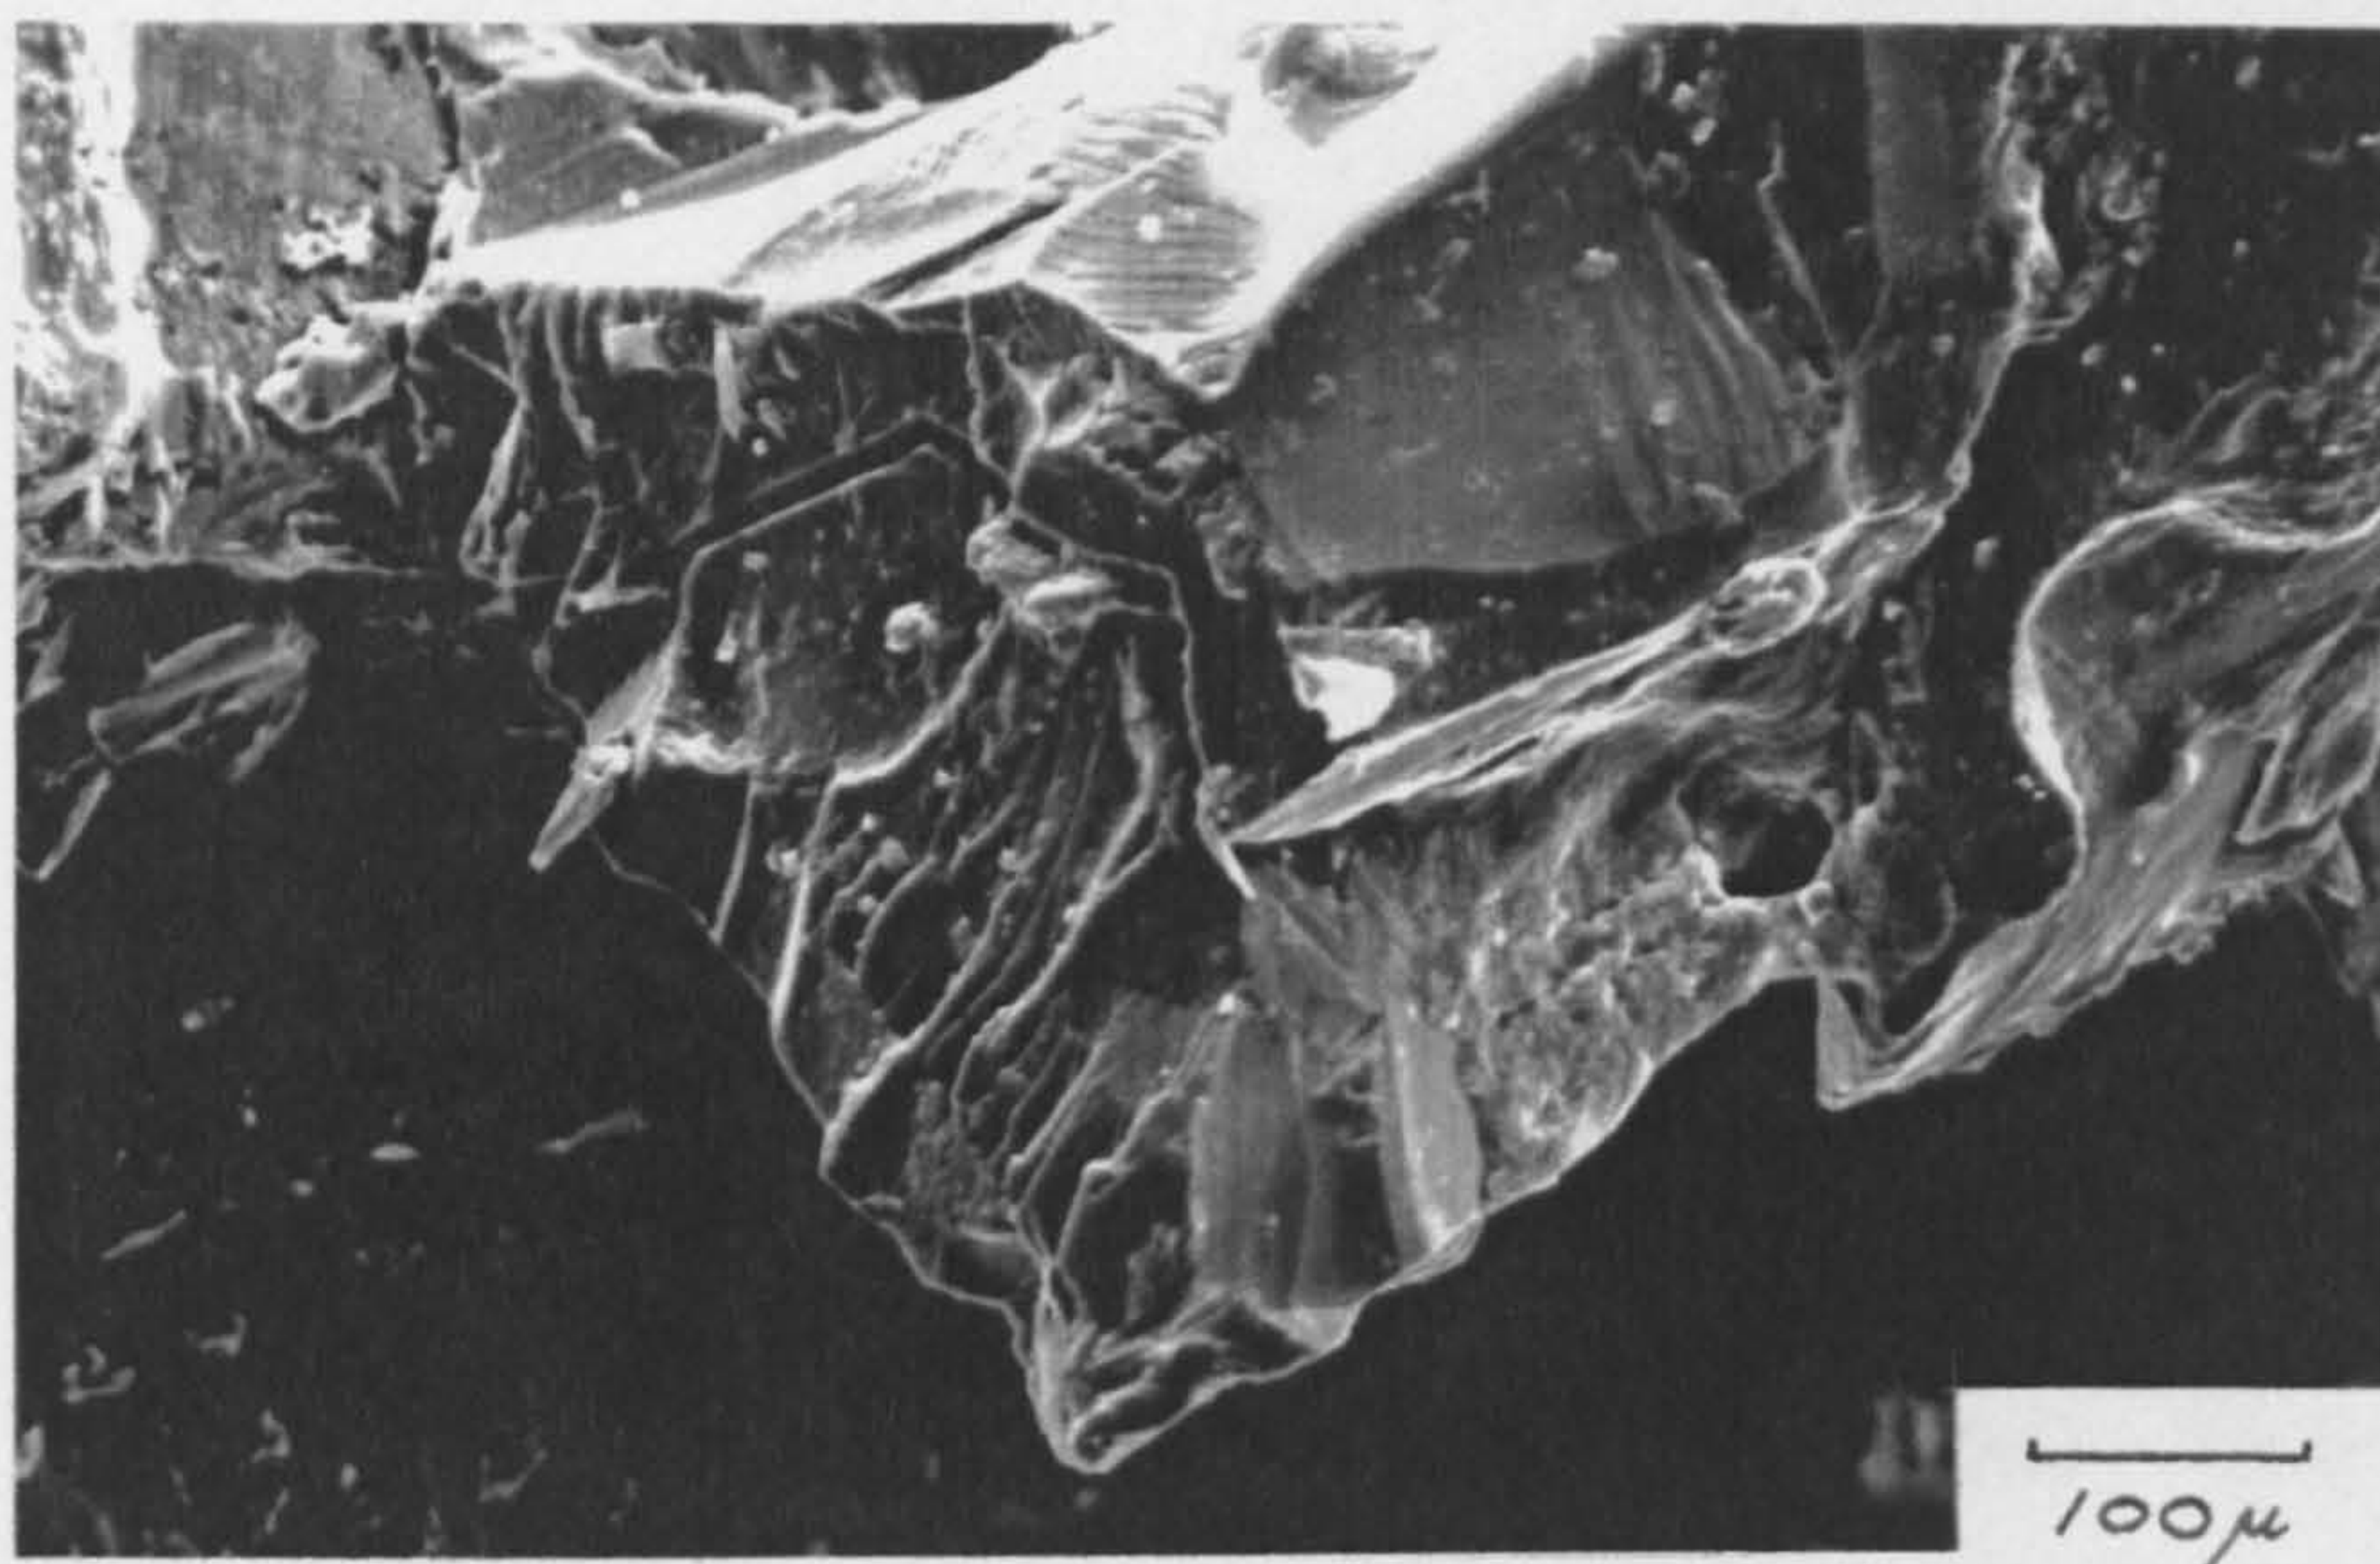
Bond post fracture of a vitrified grinding wheel. The crack shown at the grit-bond interface was probably induced by tensile stresses acting between grit and bond.
